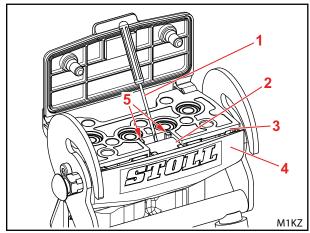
Installed Hydro-Fix lower part (without electrical system)
